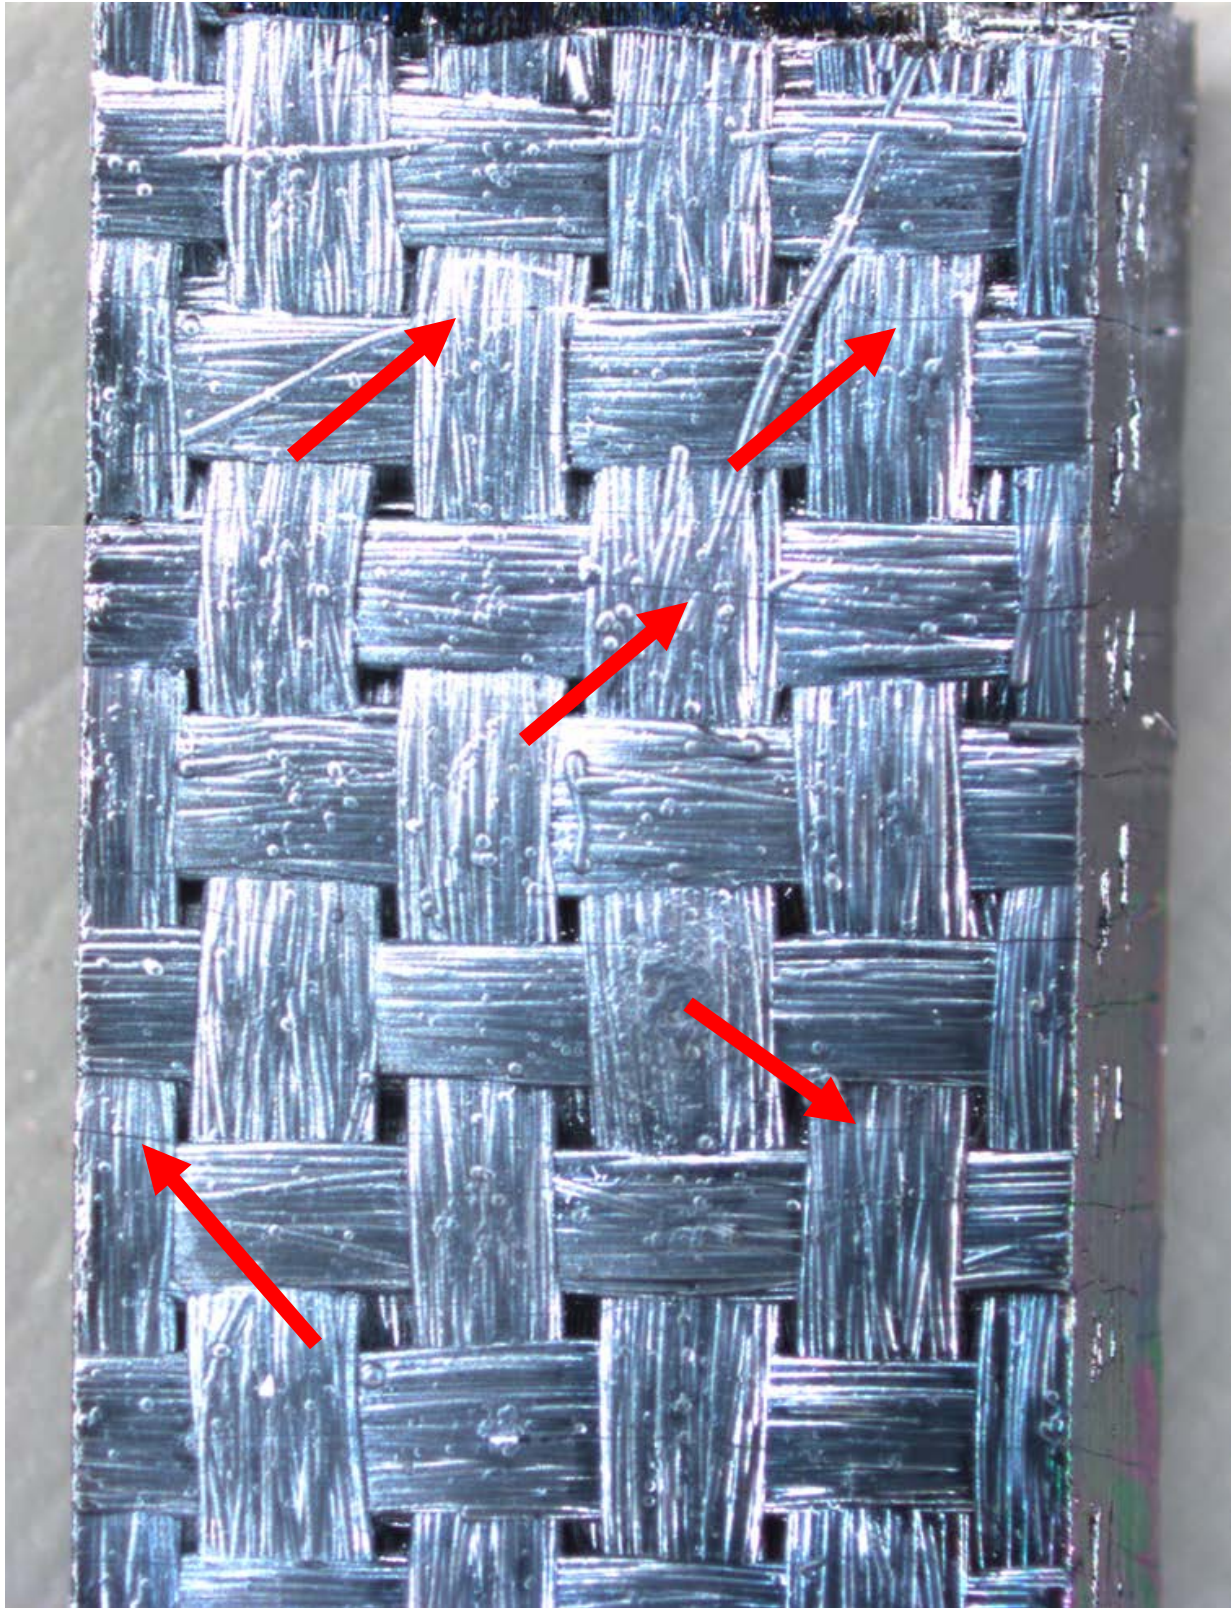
Gage section of the DB-shaped specimen L97, tested in tension to failure at 0.05 mm/s at 1300°C in air.
